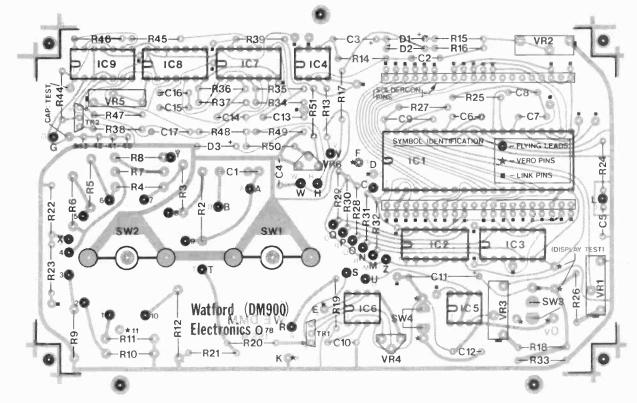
Component overlay for the DMM circuit board, points marked ■ are through board links and points marked ★ are terminal pins. Only one side of the pattern is shown for clarity.
